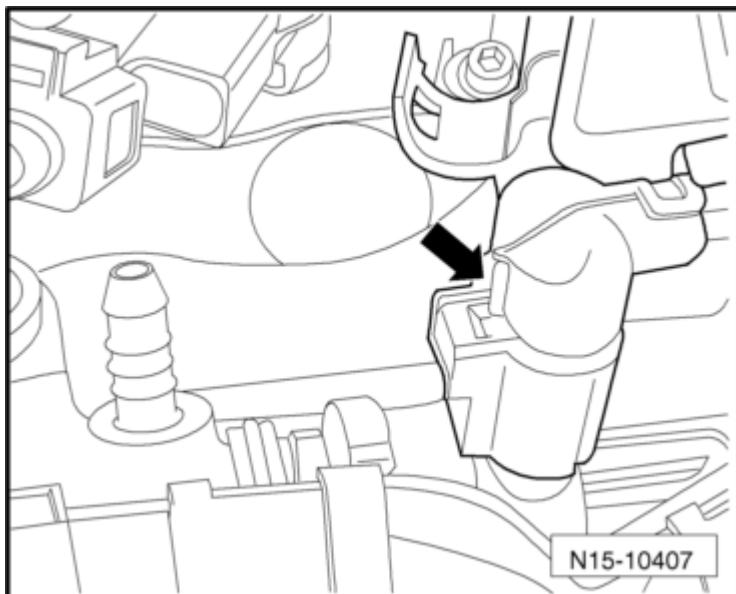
Identifying Connector To Fuel Pressure Regulator Valve -Arrow-
